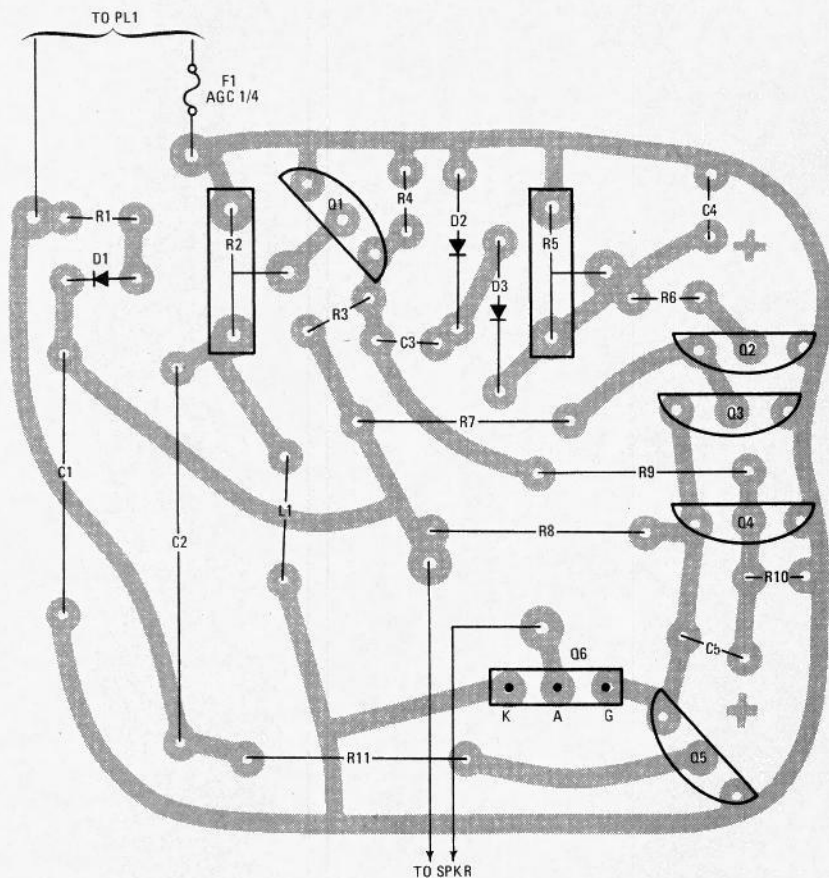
COMPONENT PLACEMENT diagram for the line receiver PC board.
